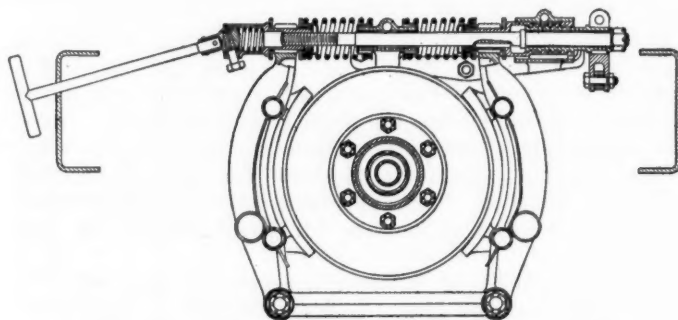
Propeller shaft foot brake employed by Buessing has convenient hand adjustment projecting through side of frame, and special means for lubricating the brake spindle shaft
